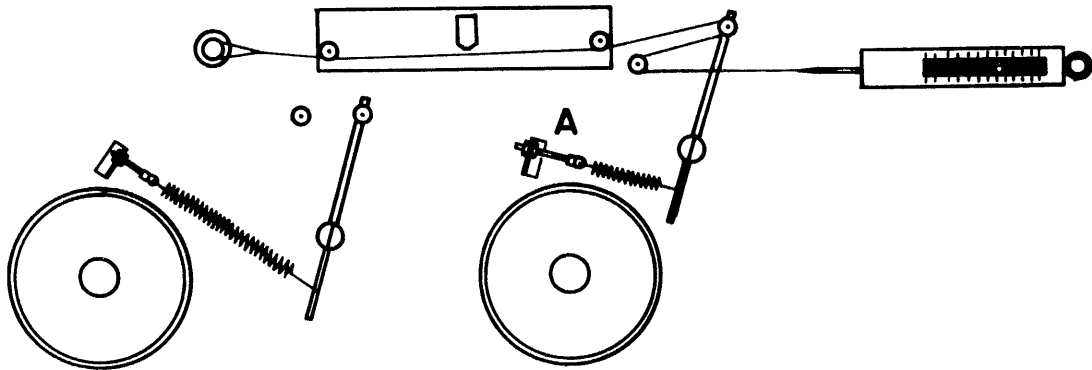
SUPPLY TENSION ARM GUIDE ADJUSTMENT
